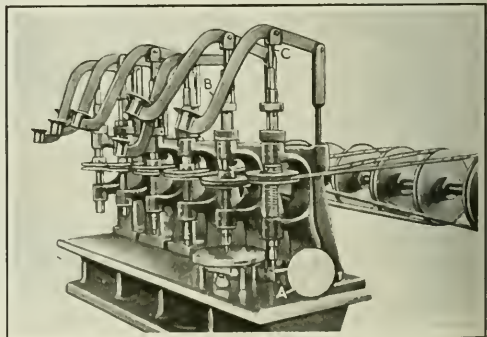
Bench Type Multiple Drilling Machine on which the Pillar Plates are drilled
